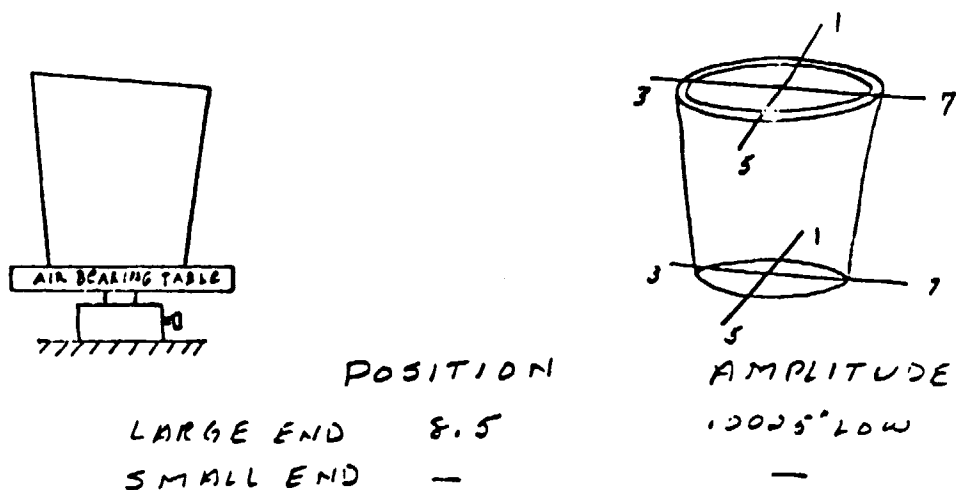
Parabola Wedge Measurements, Large End - Position 8.5
